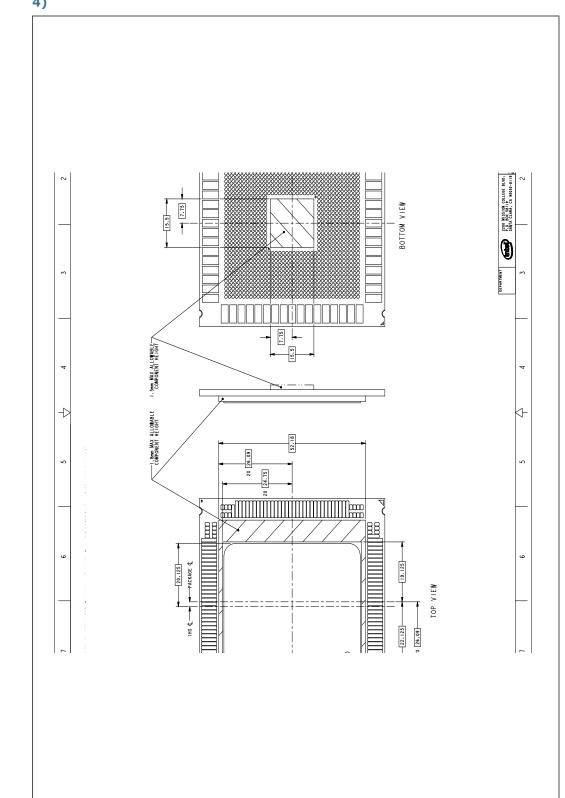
Intel[®] Itanium[®] Processor 9500 and 9700 Series Package Drawing (Sheet 2 of 4)
